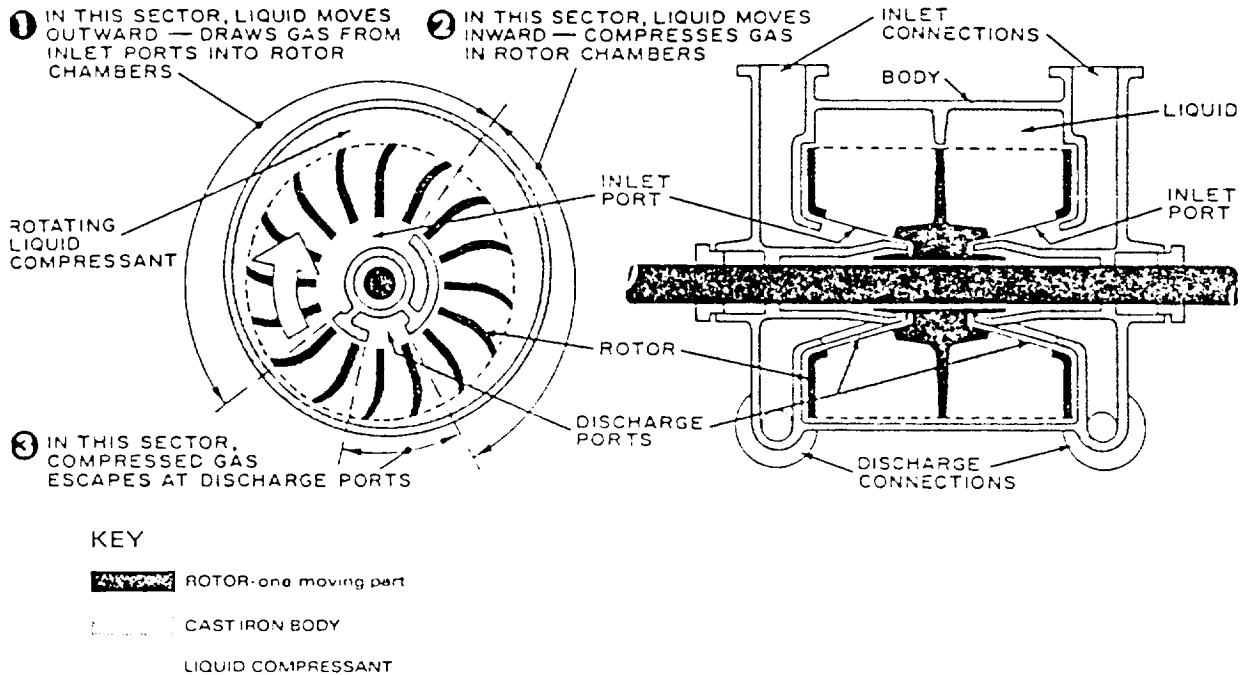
A Sectional and End View of a Liquid Piston Compressor (Courtesy of Nash Engineering Co.)
